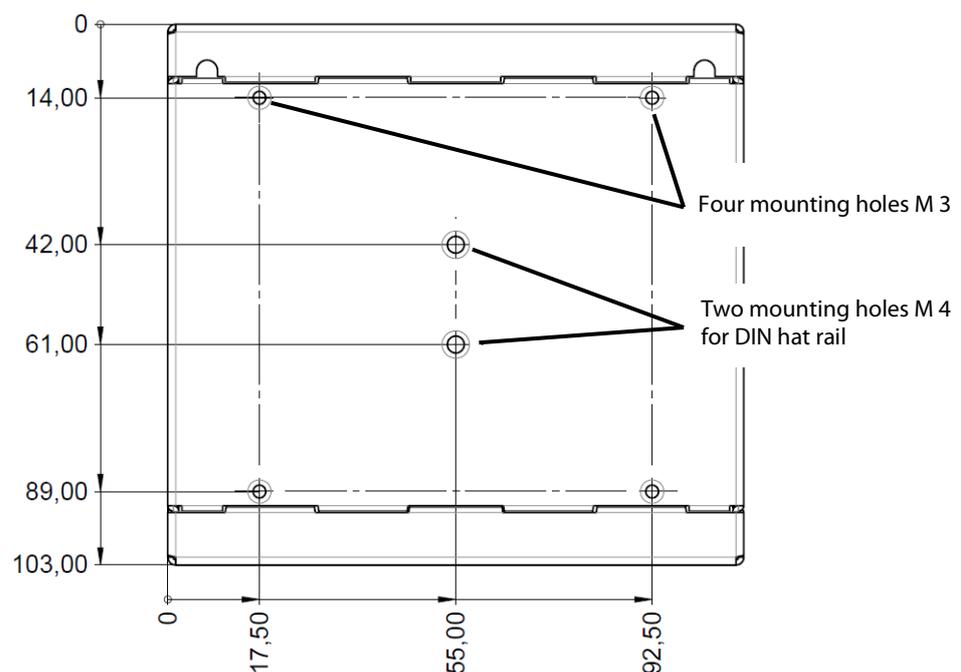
ABox-93xxLA, Dimensions of Mounting Holes (mm), Bottom View
